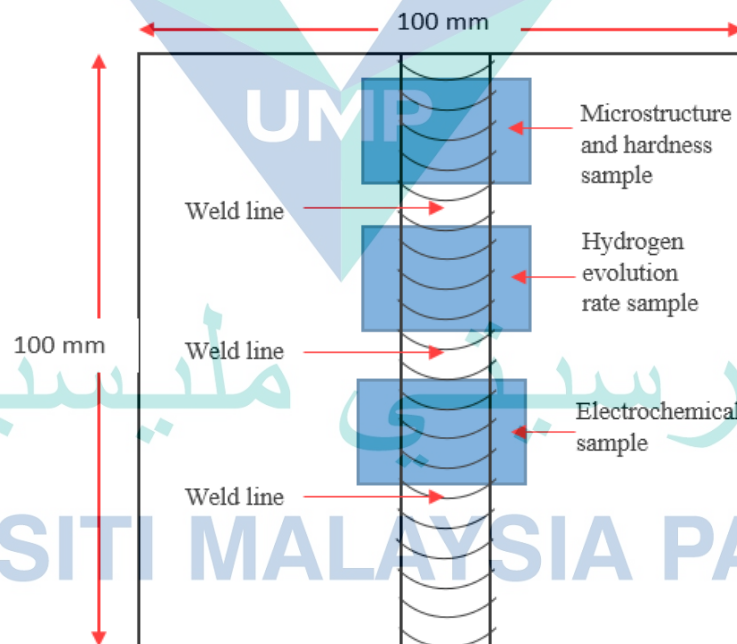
Schematic arrangement of welded sheet with cutting plan for microstructure, hardness, and corrosion samples.
